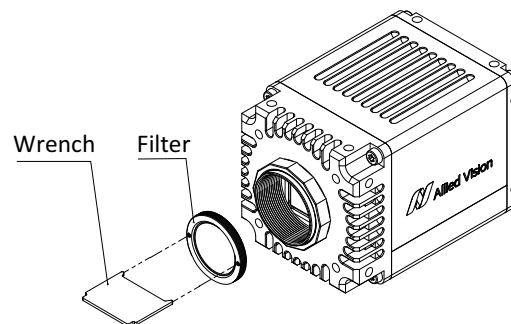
Goldeye camera with C-Mount adapter, filter, and locking wrench
